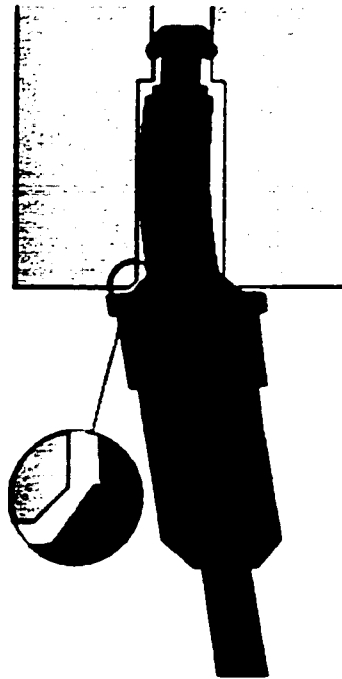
Illustration of how Alignment Taper can Slip out of Spindle Taper
